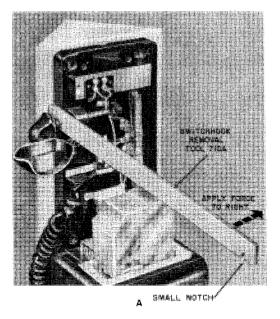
Removal of One-Piece Switchhook Located in Corner
